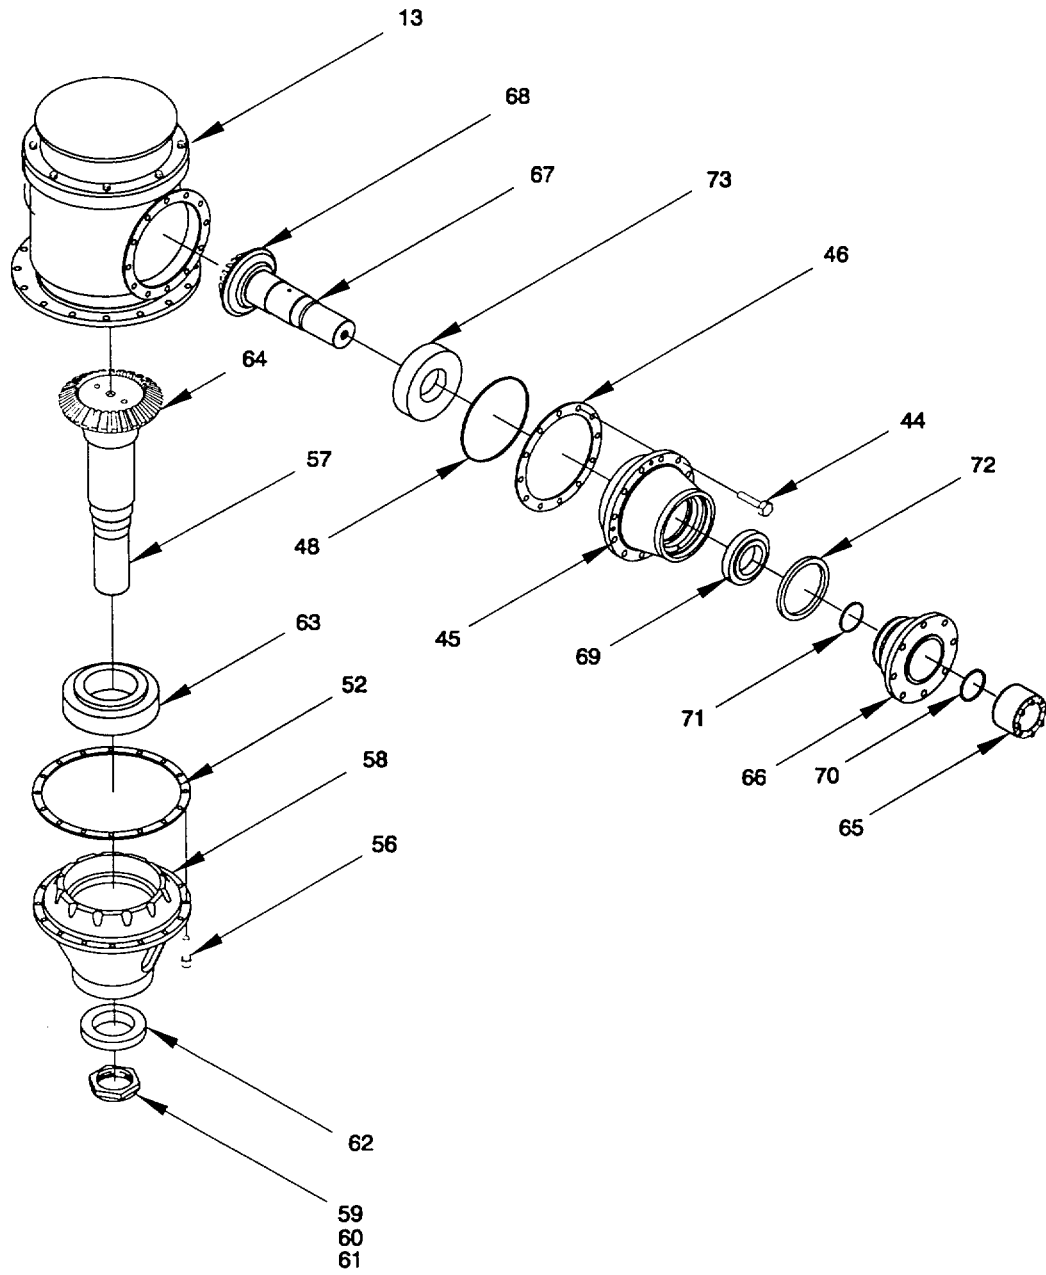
Pump-Jet, Remove, Install (Sheet 3 of 3).
